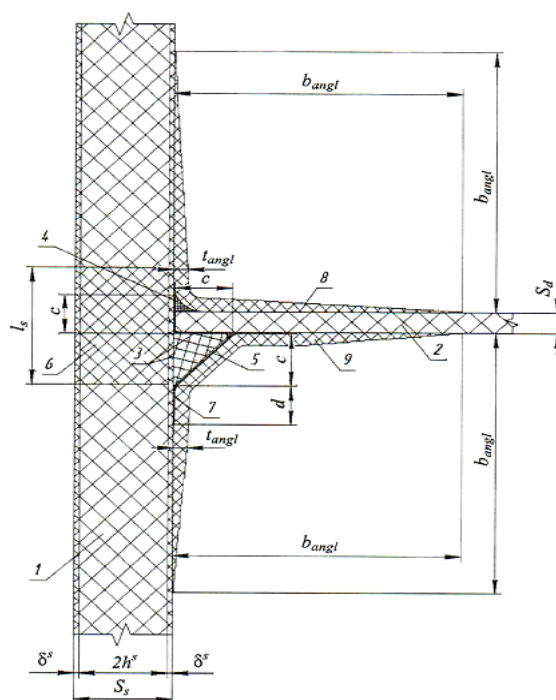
Joint of the single-skin inner deck (platform) with a sandwich side plating:
